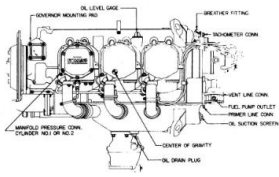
Installation Drawing - Left Side View - O-540 Series
